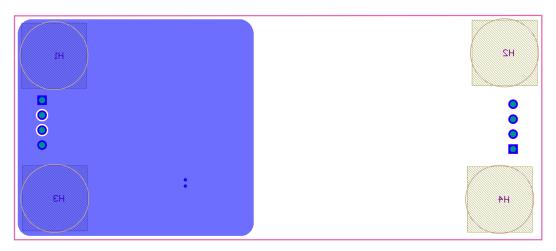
ISOM8610DFGEVM PCB Layout - Bottom
